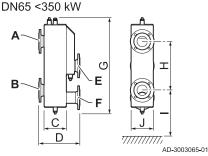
Low loss header dimensions -DN65 <350 kW - DN100
